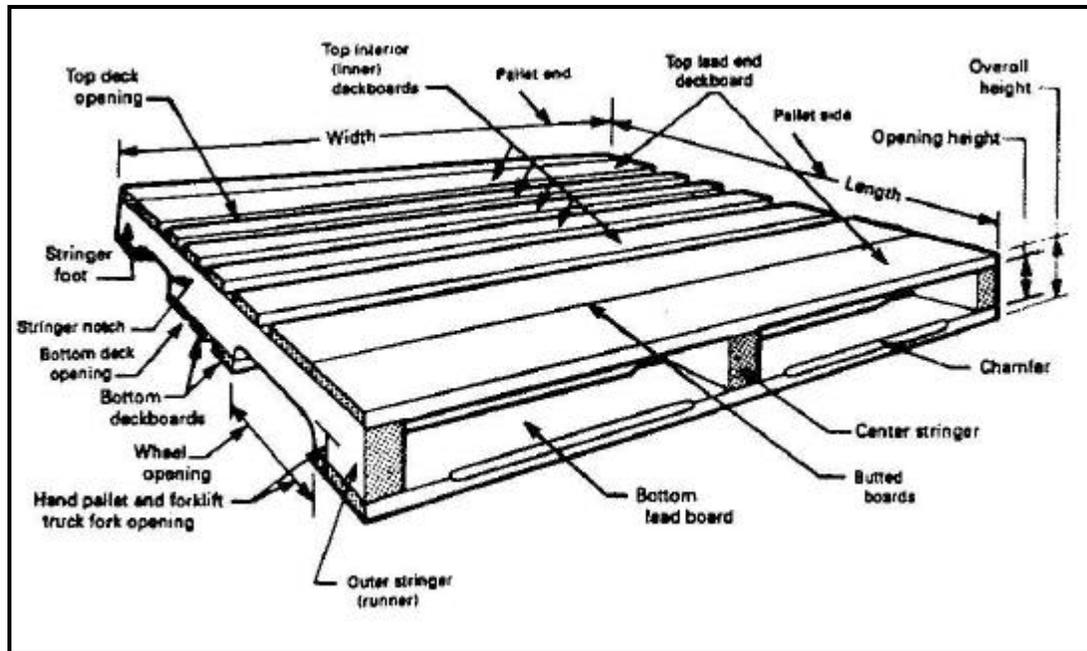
Schematic Diagram of Typical Stringer-Style Pallet
